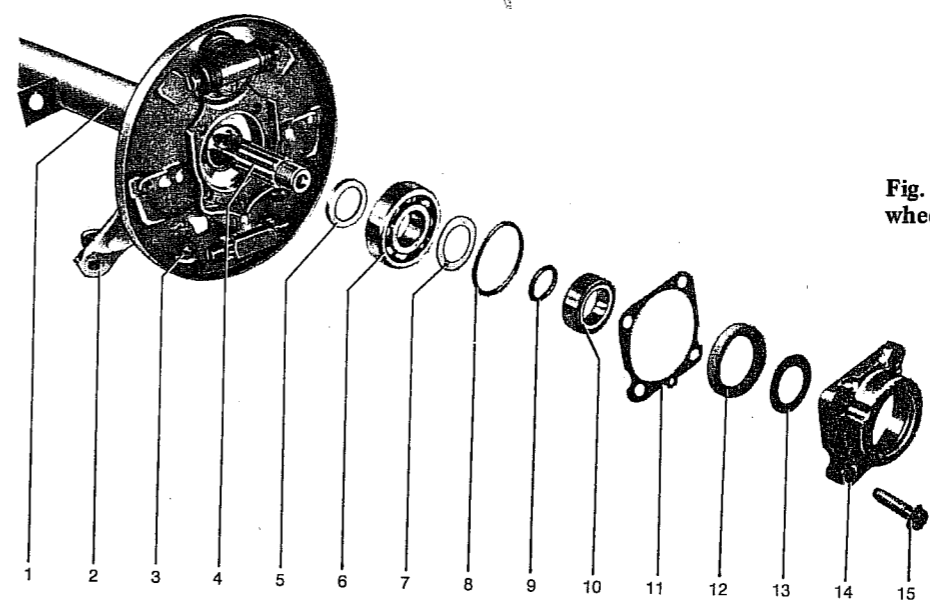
Exploded view of the rear wheel bearing assembly - Swing axle.
